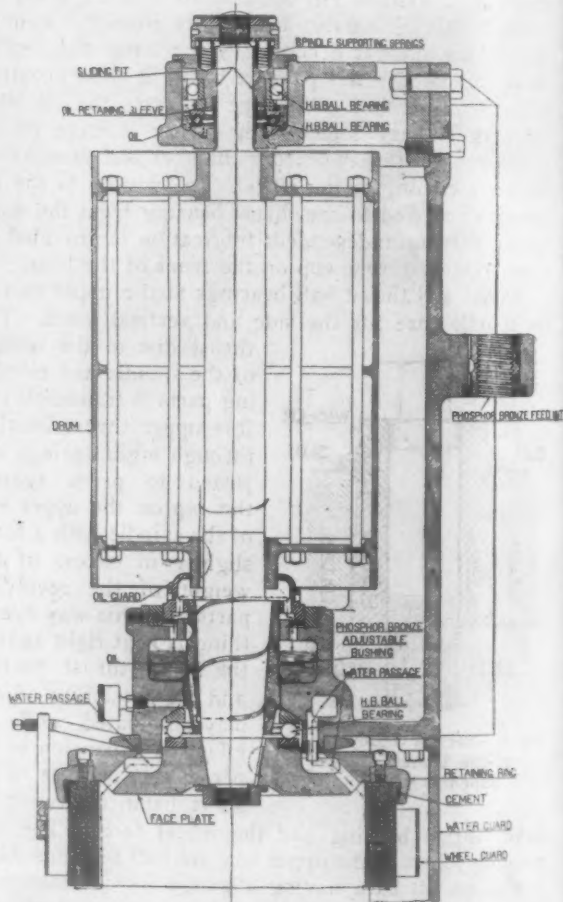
Sectional Elevation of the Grinding Head and Wheel.
